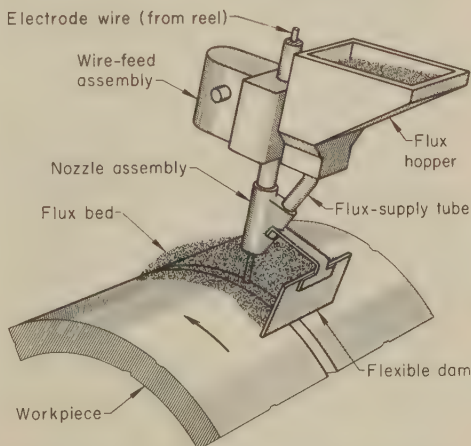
Use of a flexible dam, attached to a nozzle assembly, for retention of flux in circumferential welding
